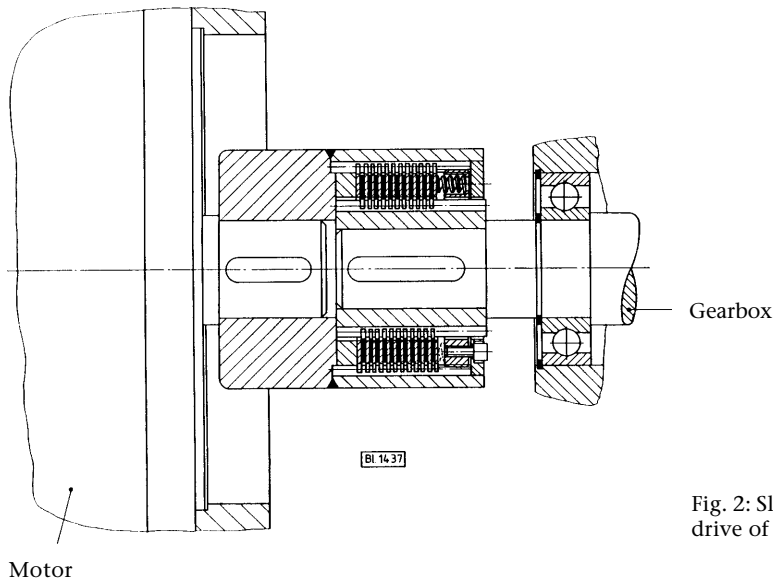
Slipping clutch, series 0600-474, fitted in the feed drive of a boring and milling machine.
